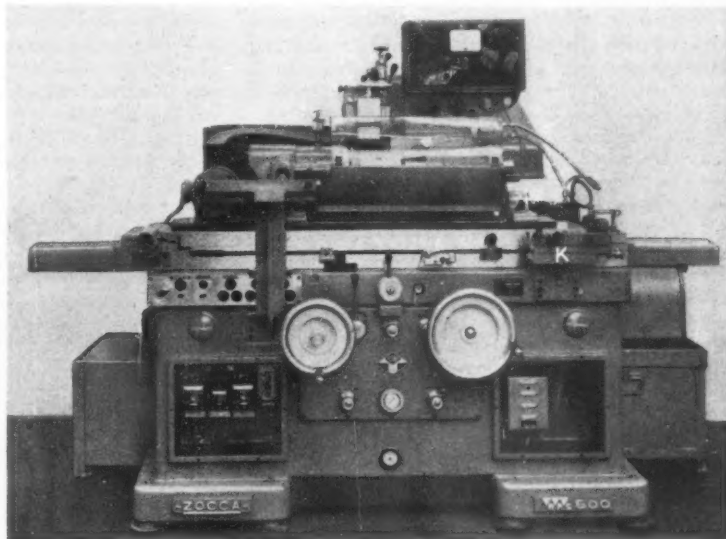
Zocca type R.P.S. hydraulic grinder of patented design, for pistons up to 7 in. diameter
